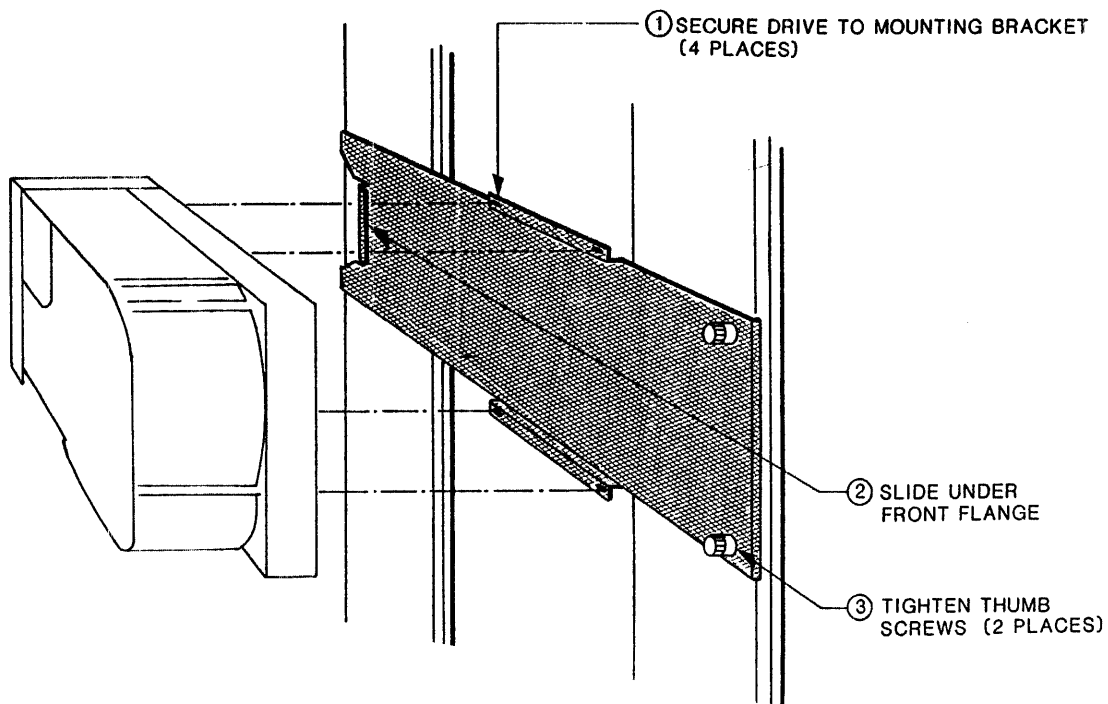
5-1/4" WINCHESTER DRIVE INSTALLATION
